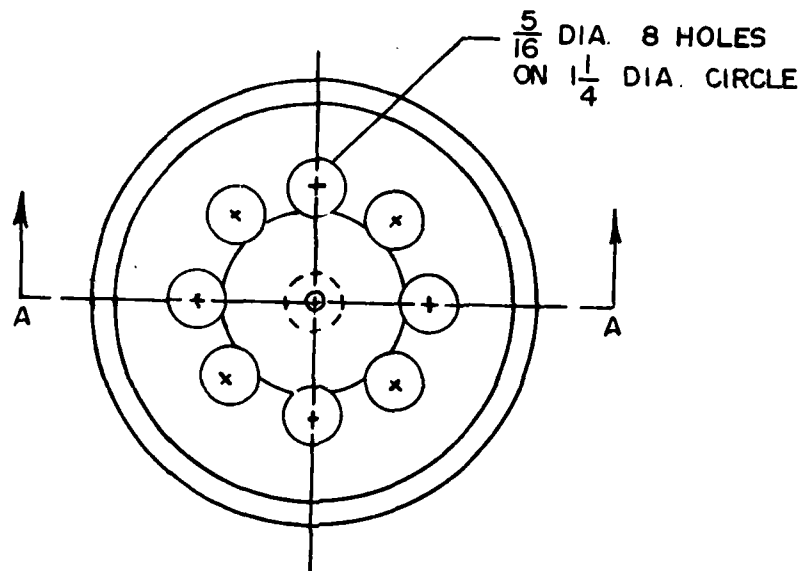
VACUUM CHAMBER SUB ASSEMBLY
